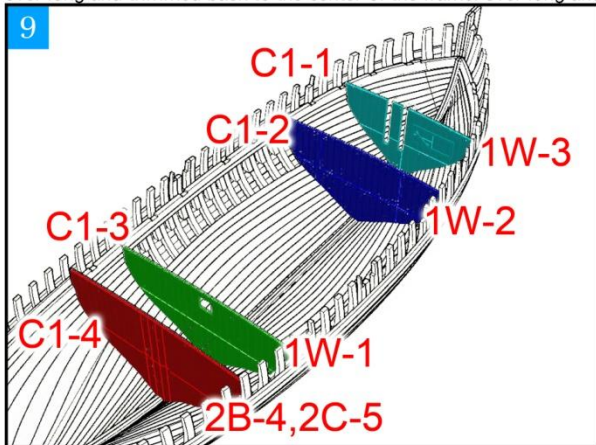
The interior bulkheads are constructed using the parts shown in the drawings. Parts C1-1, 2, 3, 4 are templates used to measure whether the interior of the hull is accurate. If it is accurate, the bulkheads can be directly installed with parts 1W-1, 2, 3 and 2B-4 and 2C-5. If there is any dimensional errors, you can adjust the outline on the templates and build up the bulkheads C1-1, 2, 3 with 1.5x5 wood strips and 2x5 wood strips for C1-4.
